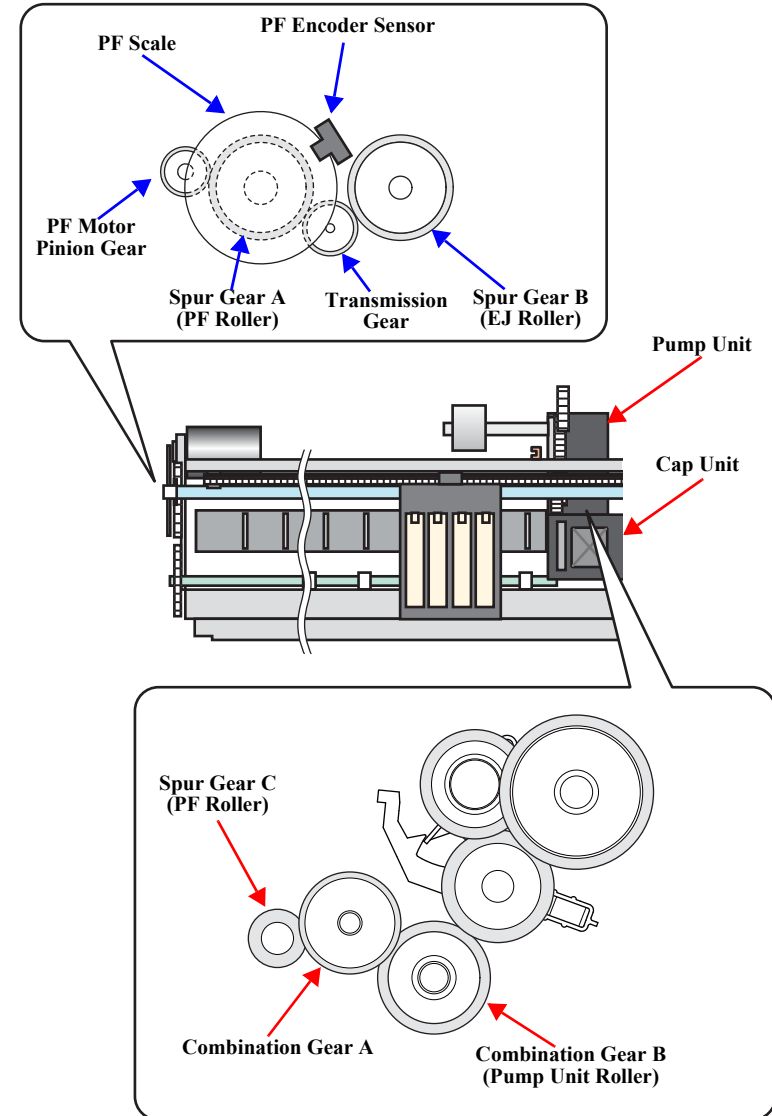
PF Motor Drive Transmission to Pump Unit
